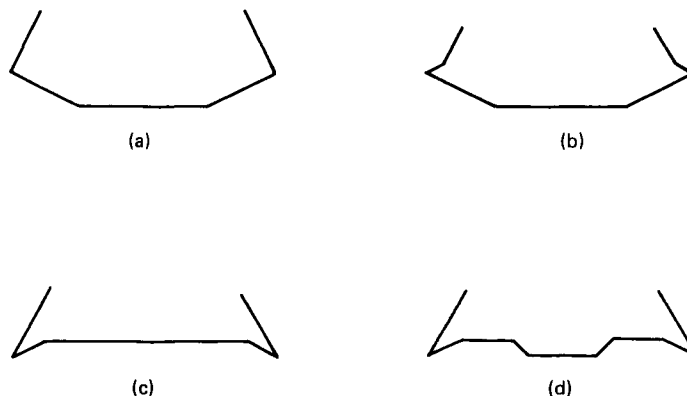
Examples of rotor (side elevation/sectional shapes)
